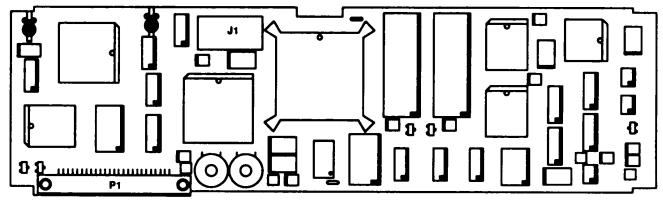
A3 LPC Vocoder Assembly Component Location Diagram (10372-3440 Rev. A)
